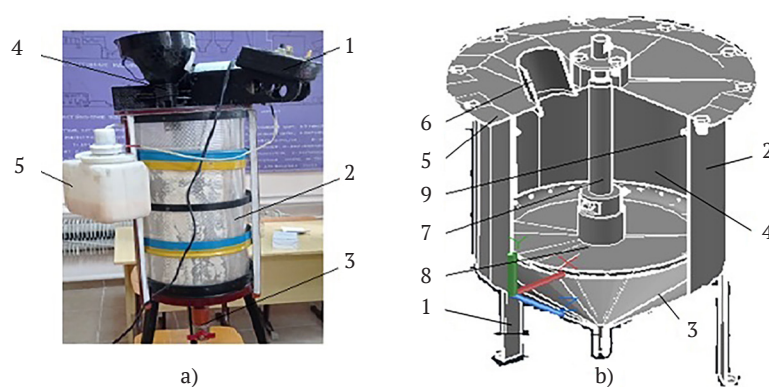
General view of the mixer a): 1 – control panel, 2 – cylindrical working chamber, 3 – nozzle for discharging the paste, 4 – flour vibratory dispenser, 5 – dispenser of liquid components; 3D model b): 1 – body, 2 – cylindrical and 3 – conical parts of the working chamber, 4, 5 – lid with an inlet 6 for flour dispensers, 7 – drive shaft with plate discs, 8, 9 – jet sprayers
